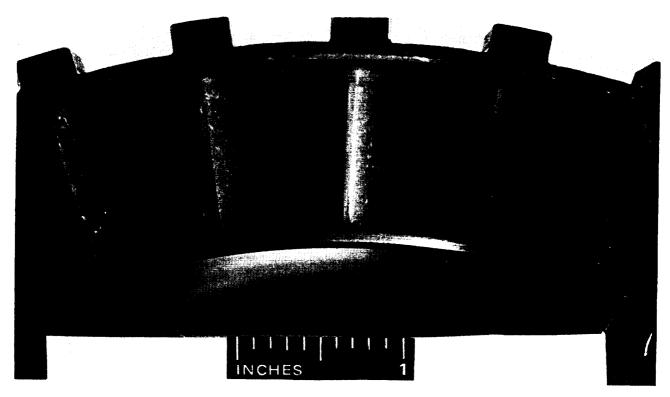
PHOTOGRAPH OF SSME FUEL-SIDE TURBINE SECOND STAGE VANE, FRONT VIEW
